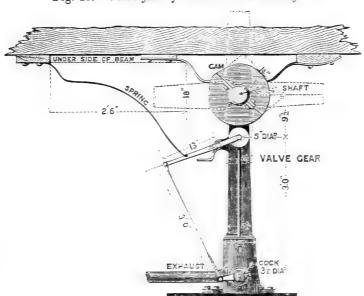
Valve-gear of Trevithick's Steam-engine.
